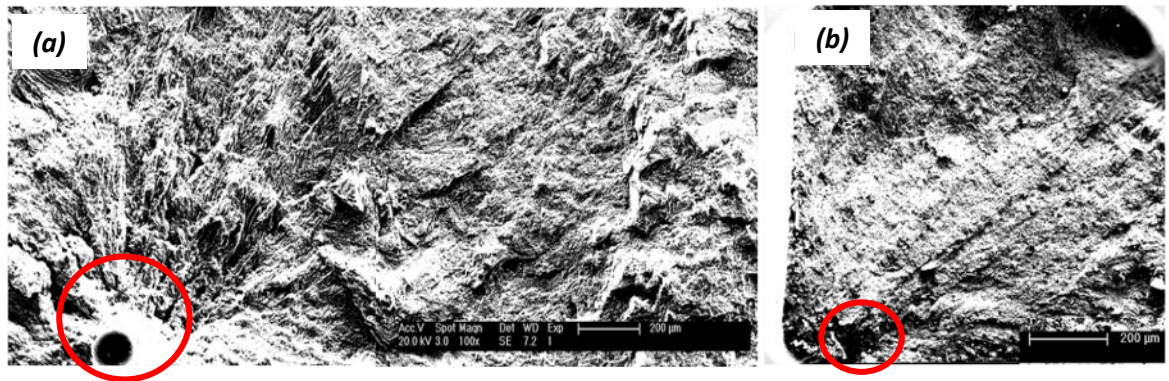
Fracture surfaces from EBSM samples showing (a) sample CZ 2-2 and (b) CY 2-3 both with crack initiation by pores near the surface. These samples failed with less than 1 million cycles.
